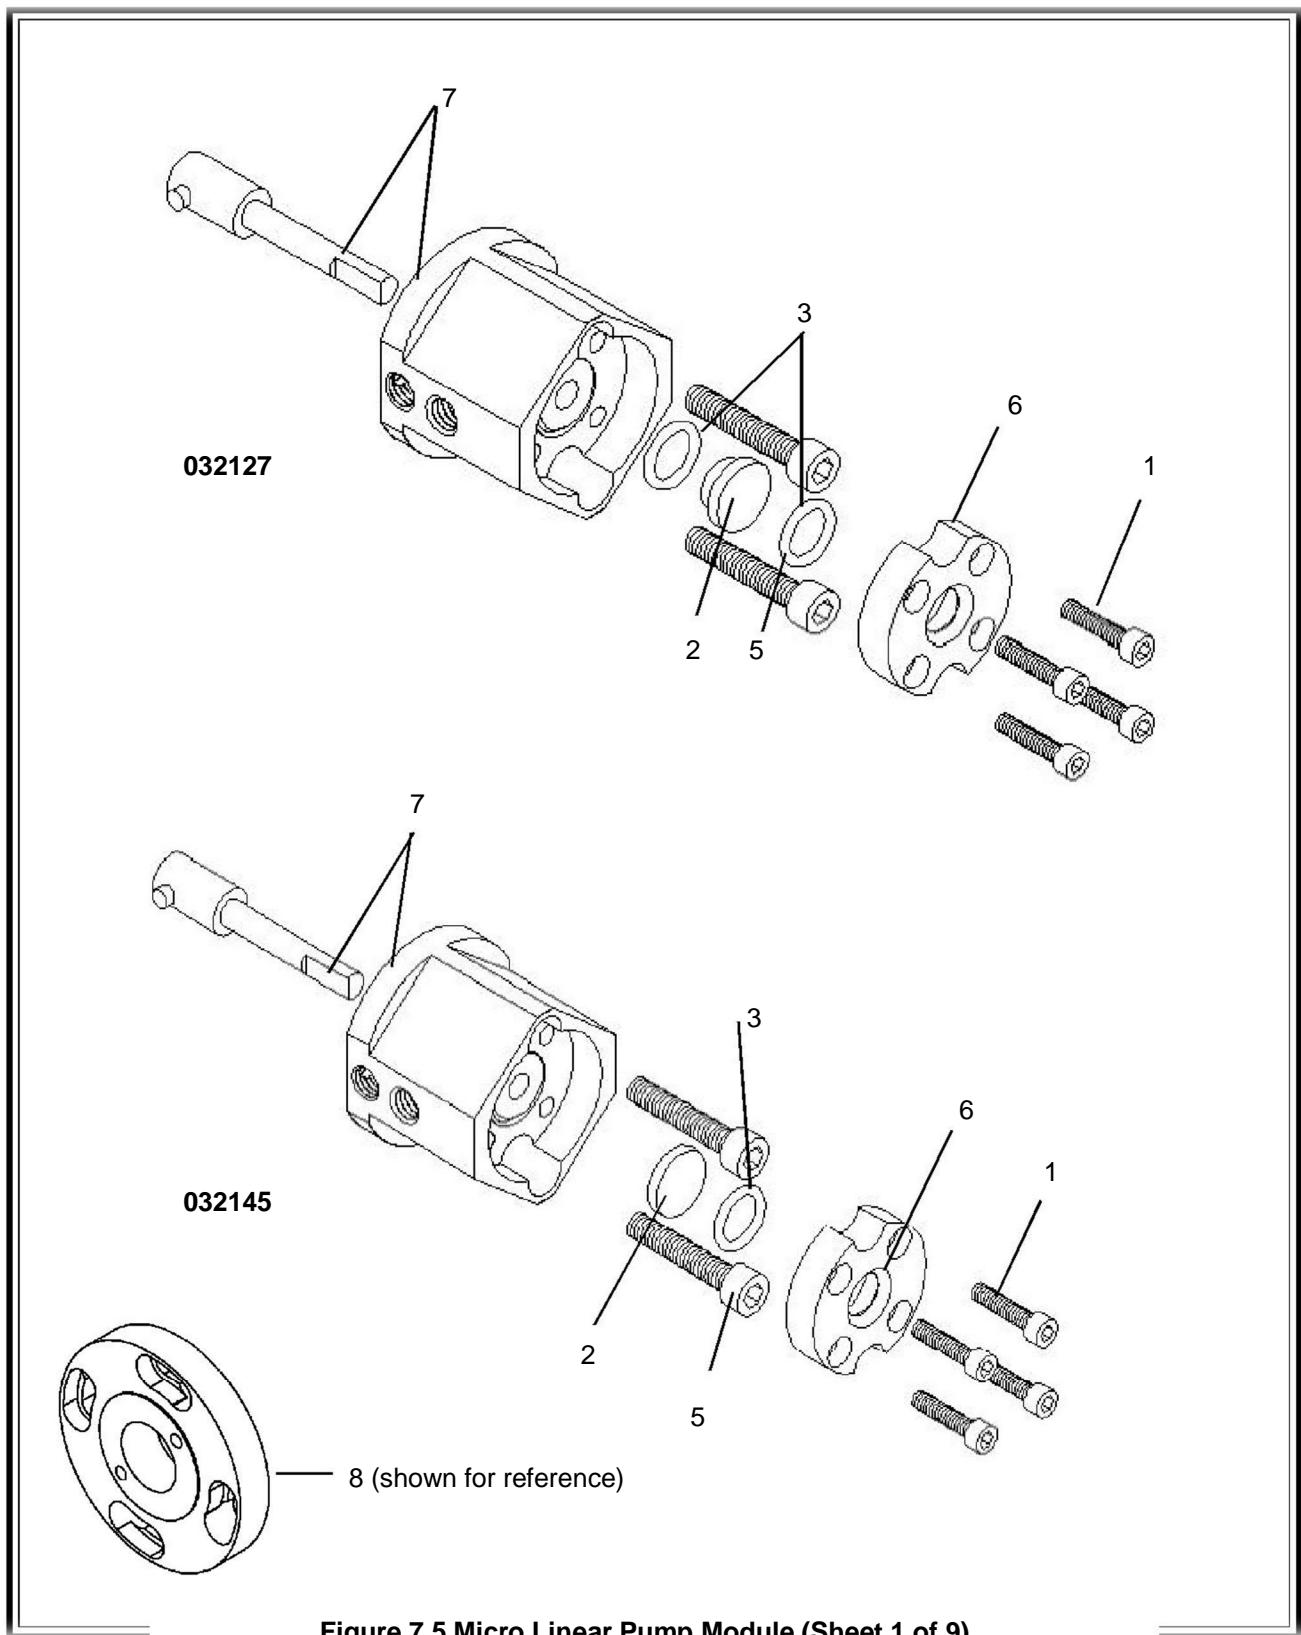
Micro Linear Pump Module (Sheet 1 of 9)
